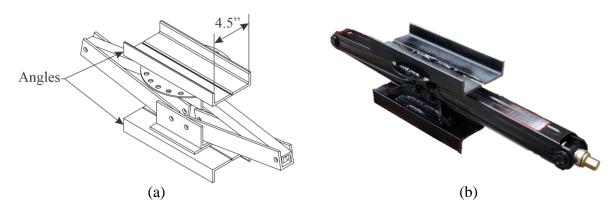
Scissor jack assembly: (a) Schematic drawing; (b) Fabricated assembly
